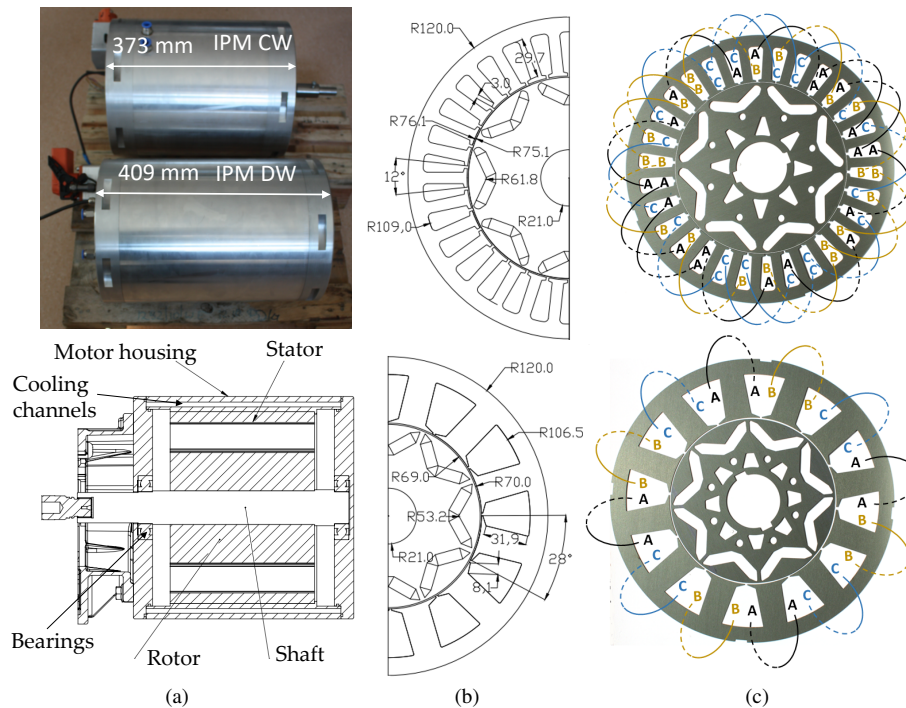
30/8 and 12/8 IPM motors: 80 kW IPM AC motor prototypes used in the electric vehicle drive with a 3D view and a cross-sectional view (a); dimensions (b); radial view of the DW and CW layout and the coil mounted in a 3-phase stator (c)
